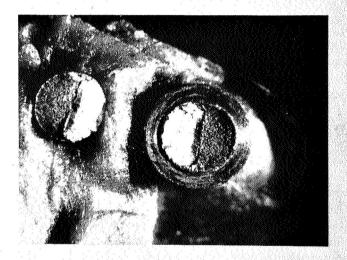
Photomacrograph showing mating ends of the fracture. 10x
